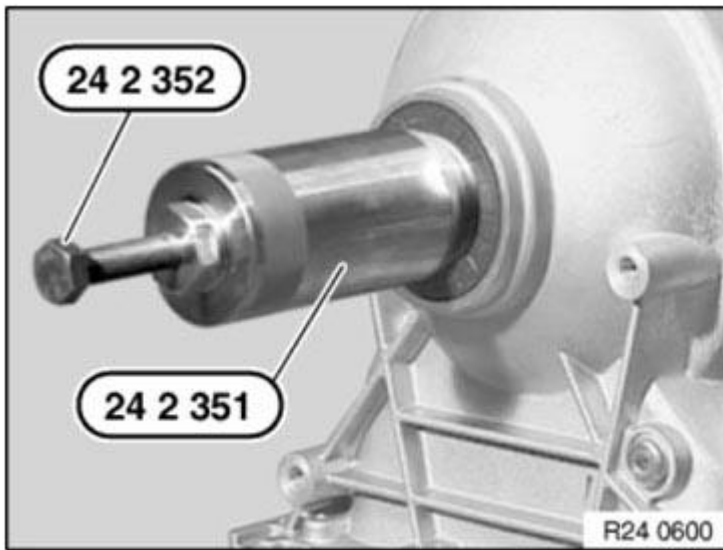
Pulling Out Radial Shaft Seal Using Special Tool 24d 2 352
